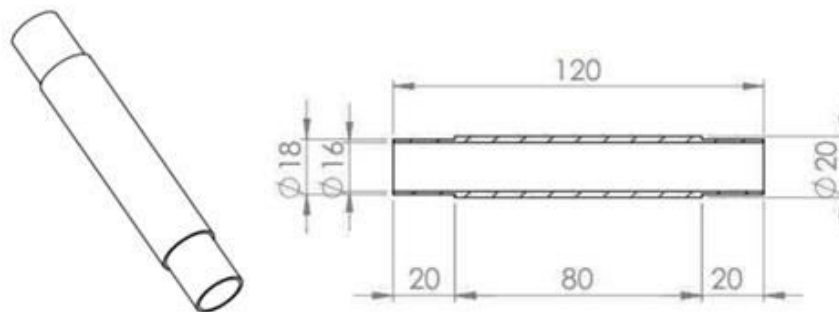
Geometry and dimensions of the thermal fatigue test specimen.
